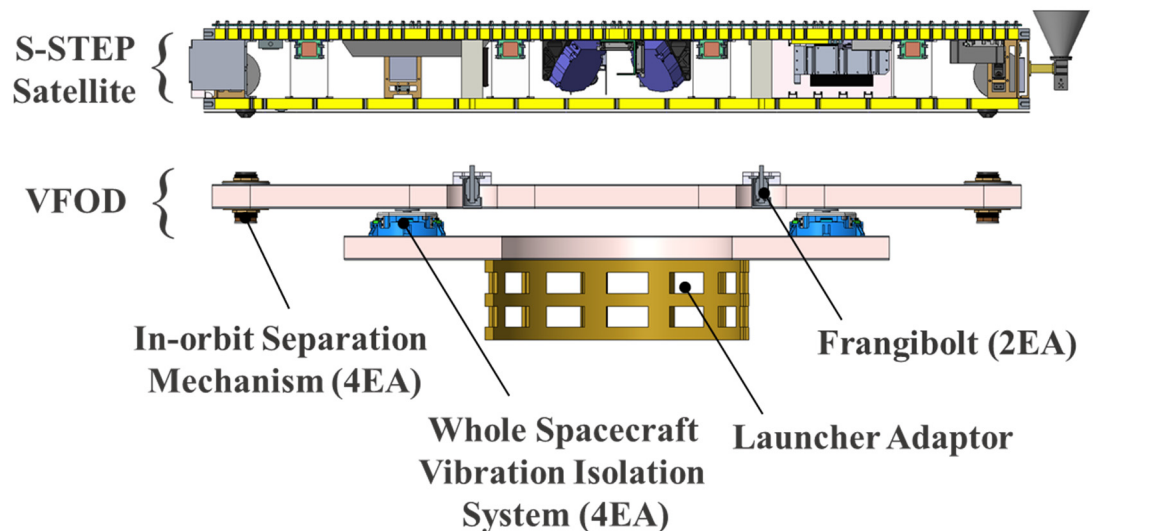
Exploded cross-sectional view of the S-STEP system, VFOD, and launcher adaptor.
